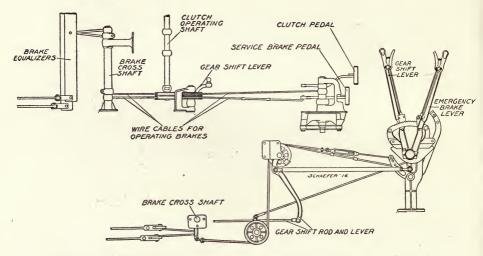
Mogul Brake, Clutch and Progressive Type Gear Control.
